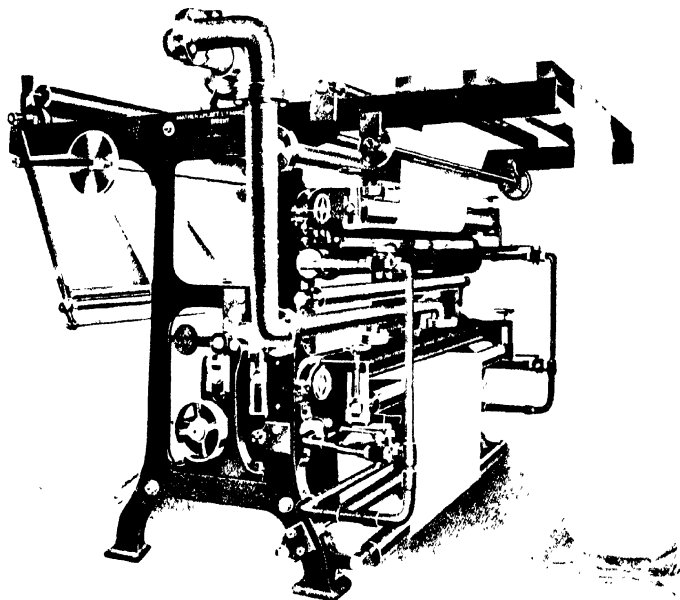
Two Burner Gas Singeing Machine (English Type).
